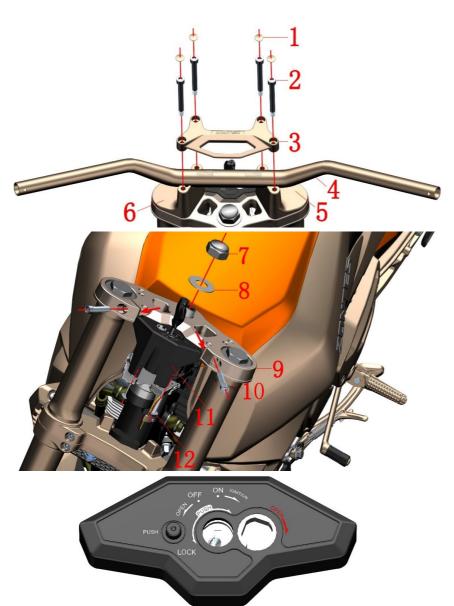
I	FRONT FORK	Direction handle, upper plate assembly	CHK	40)
